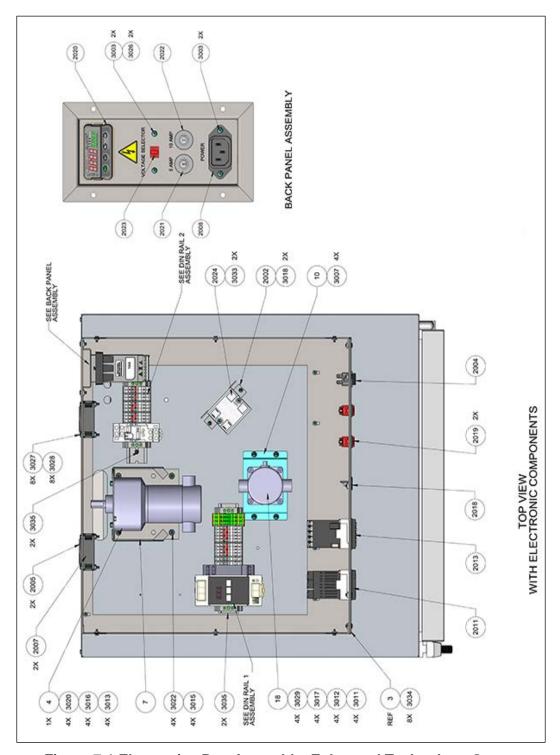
Electronics Box Assembly, Enhanced Technology Ovens
